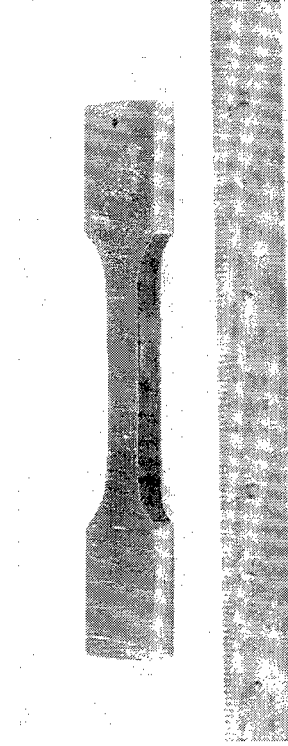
Sintered stainless steel (17-4PH) tensile coupon fabricated by FDMet processing.
